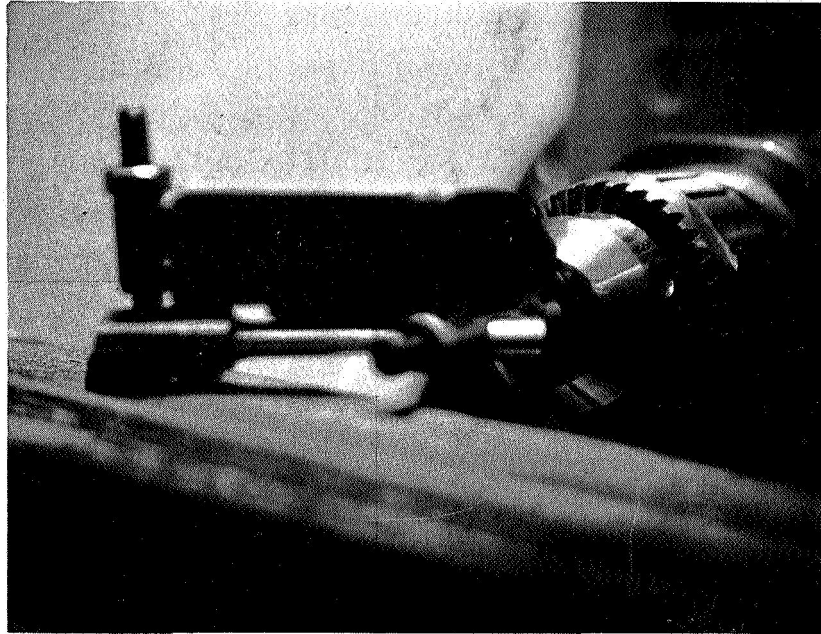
EARLY METHOD USED TO RIGIDIFY THE SCRAPER
